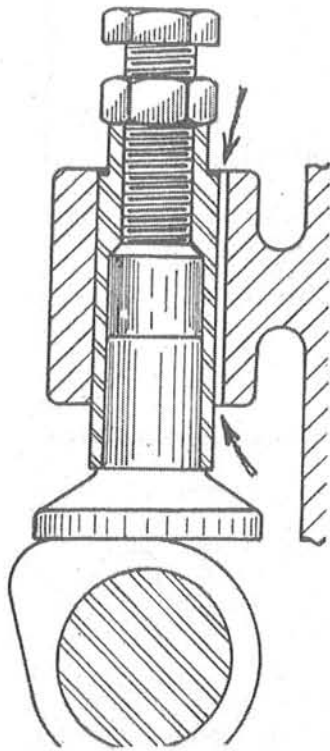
Section of push rod showing excessive clearance in guide, which causes noise when cam lifts push rod.
